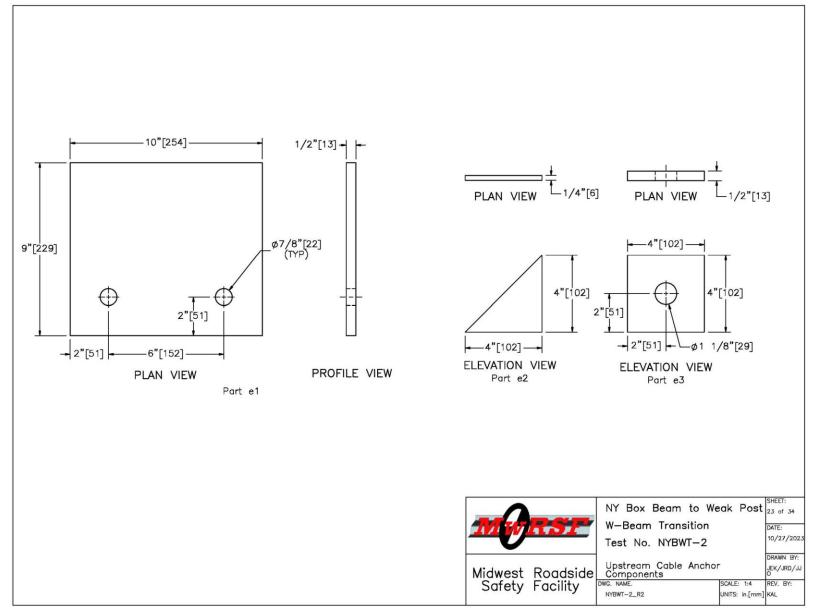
Upstream Cable Anchor Components, Test No. NYBWT-2
